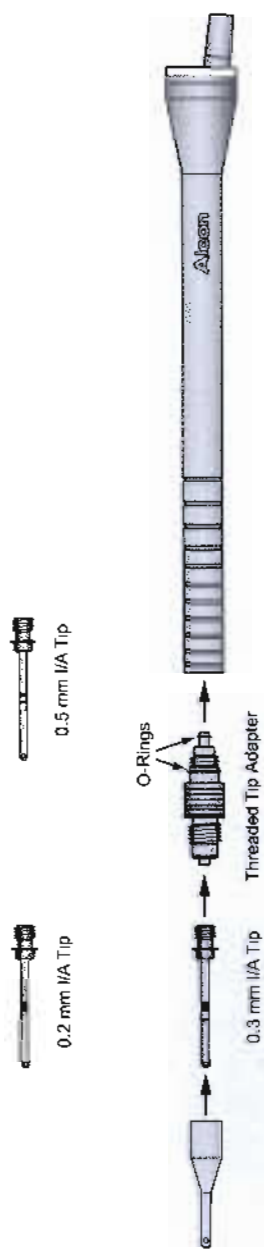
Ultraflow*<sup>TM</sup>\* IT handpiece with infusion sleeve, reusable I/A tip, and threaded tip adapter
